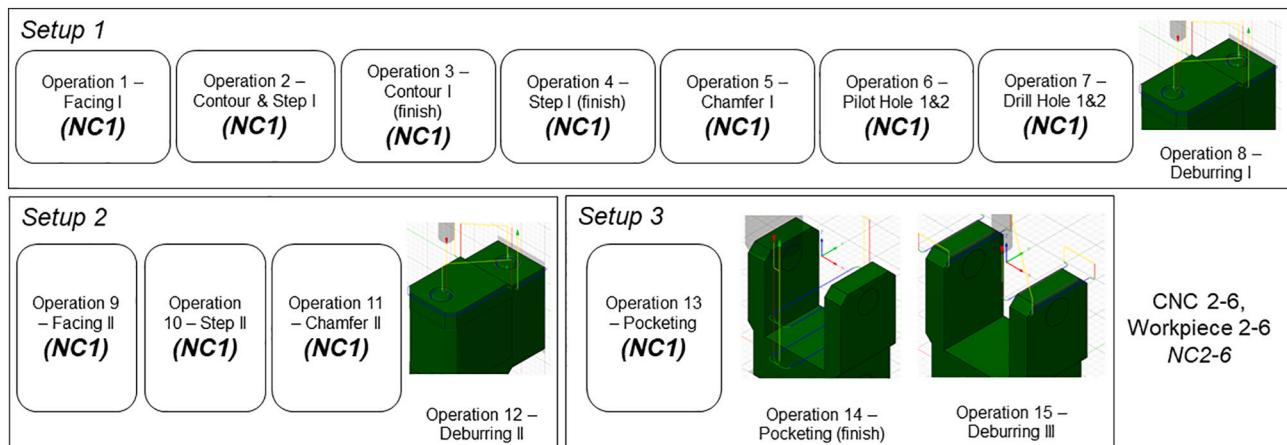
CNC machining strategy utilized to manufacture part NC2 and subsequent parts NC3–4.
